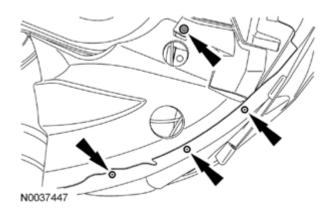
Locating LH Fender Splash Shield Mounting Screws Courtesy of FORD MOTOR CO.
